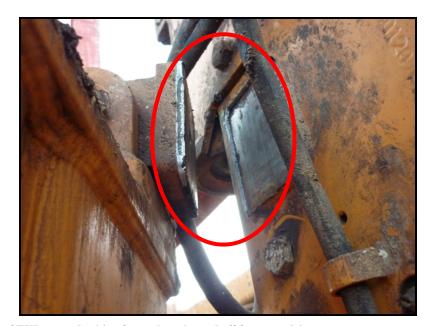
Upper clevis weld of EXI torque bushing front plate sheared off from top drive
